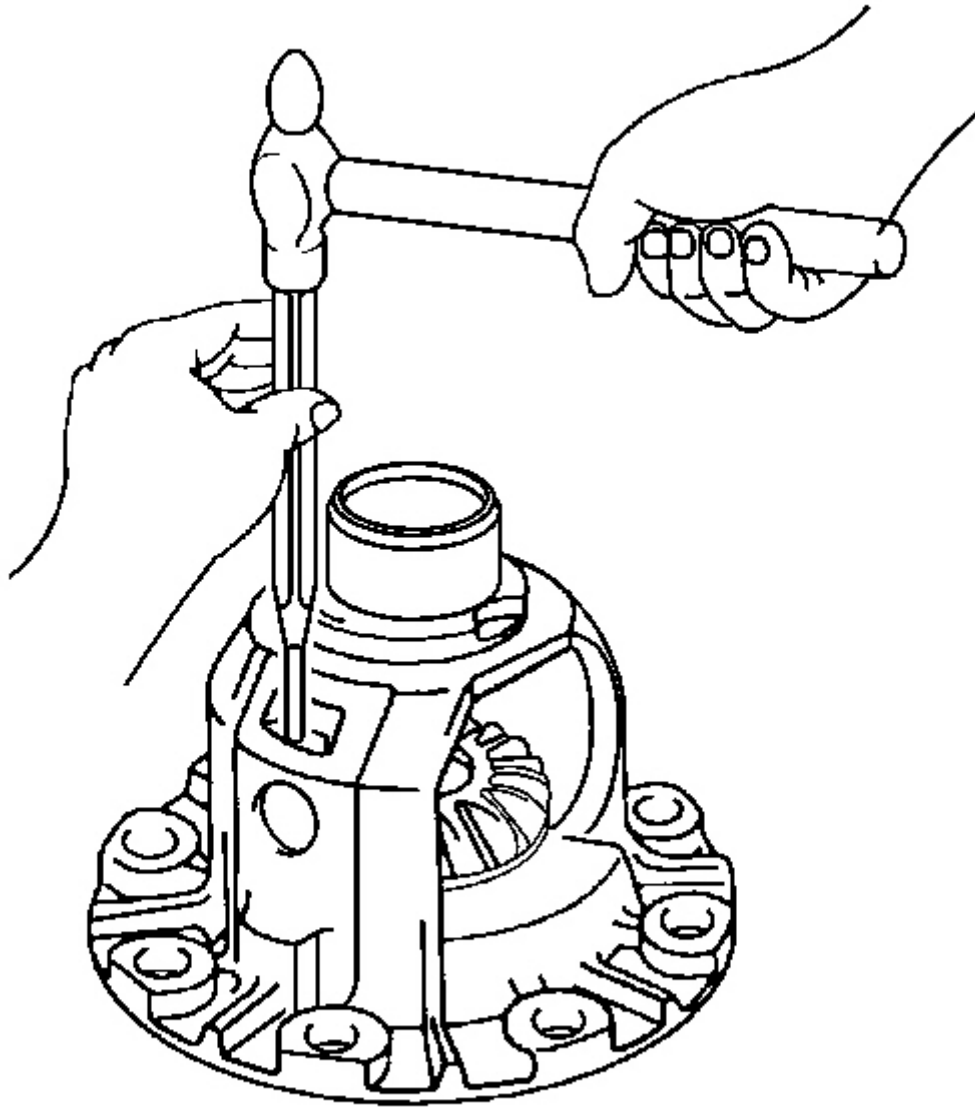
Driving Pin From Ring Gear Side Using A Pin Punch & Hammer
